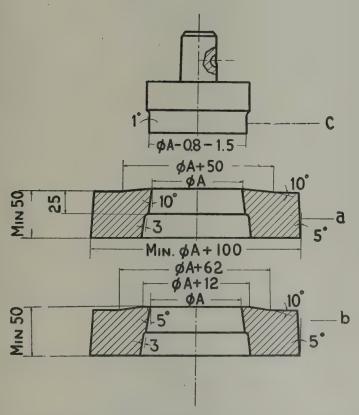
Design principles and standard dimensions of trimming tools for round forgings: (a) Trimmer blade for hot work; (b) Trimmer blade for cold work; and (c) Punch common for hot and cold work
